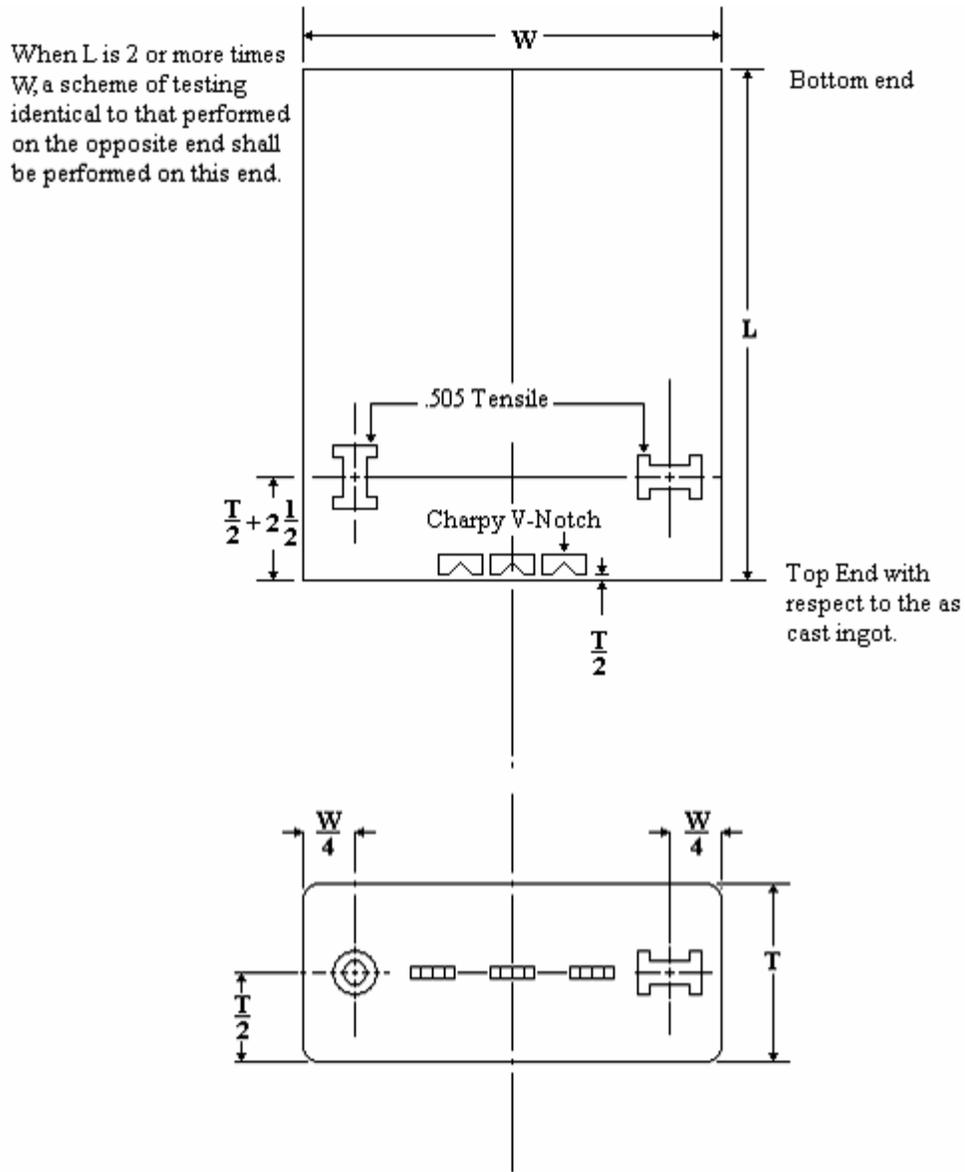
Typical Schematic Diagram of Test Specimen Location for 6-Inch Thick Forgings "Rectangular Like" in Cross Section (See C.4.4.2.2 for details on test specimen location.)
